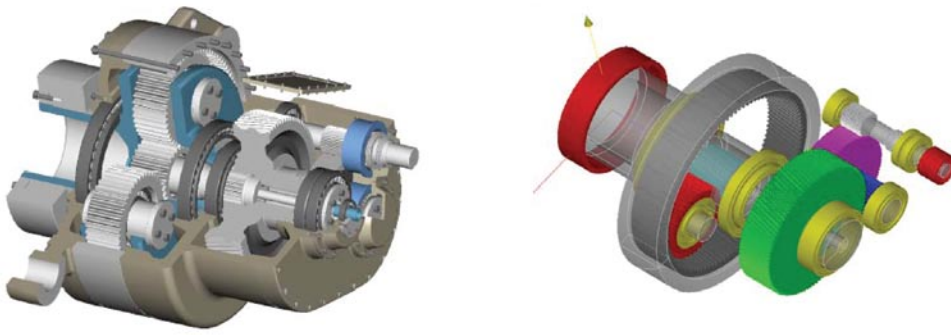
LEFT: CAD MODEL OF A 1, 5 MW GEARBOX [2]; RIGHT: KISSSYS MODEL OF A 1, 5 MW GEARBOX (SHOWING ONLY ONE PLANET).
